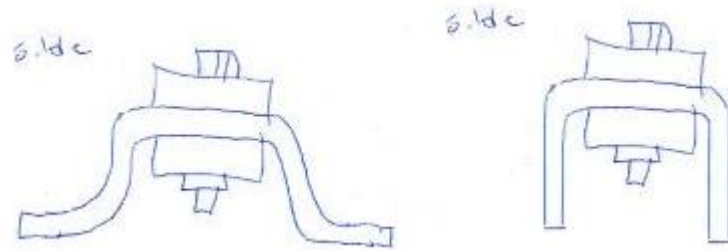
Concept C1.1.1c stabilizing design side views [28].
